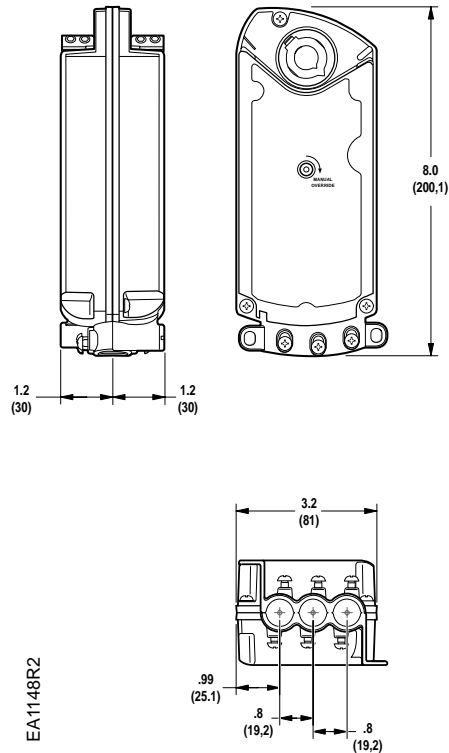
Dimensions of OpenAir GND Actuator in Inches (Millimeters).
